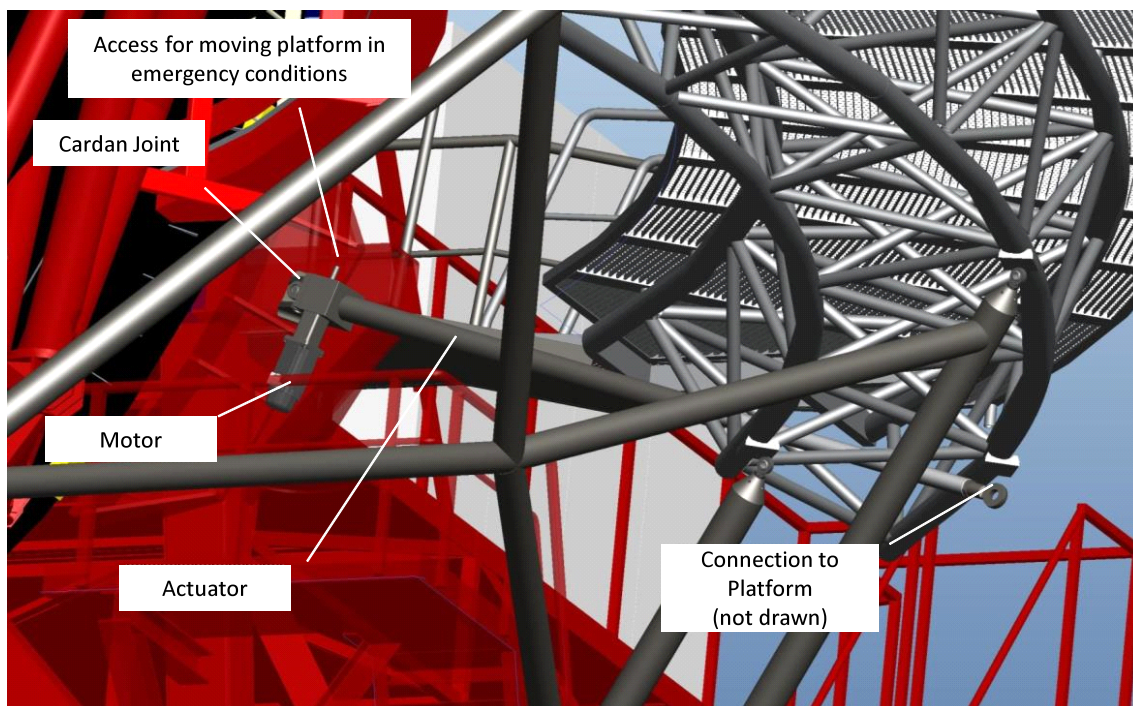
Location of the actuator mounted between Half Moon platform and the elevation motor supports.
